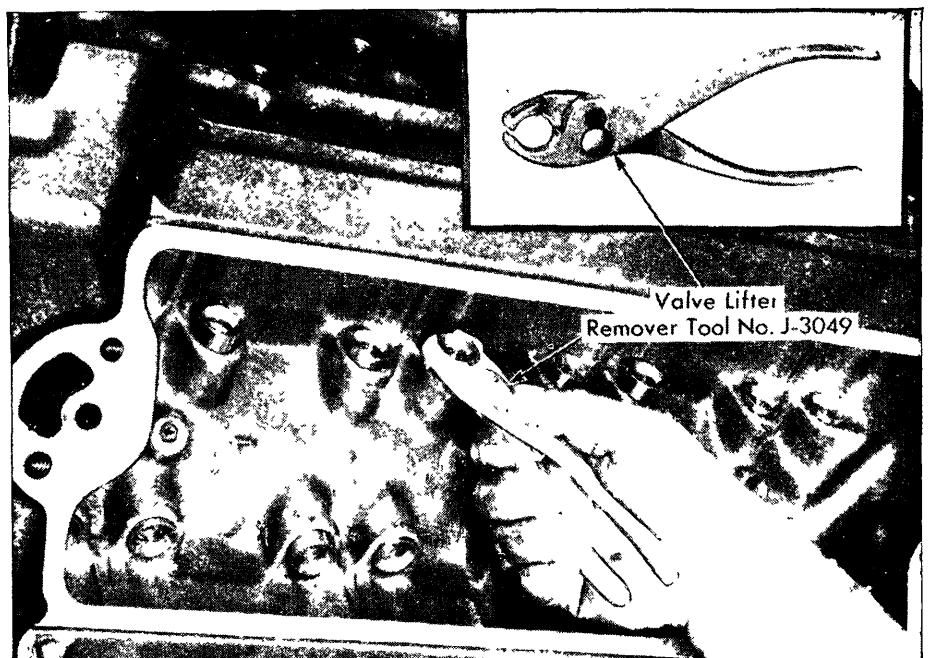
Showing special pliers used to remove stuck valve lifters from 1949-52 engines
